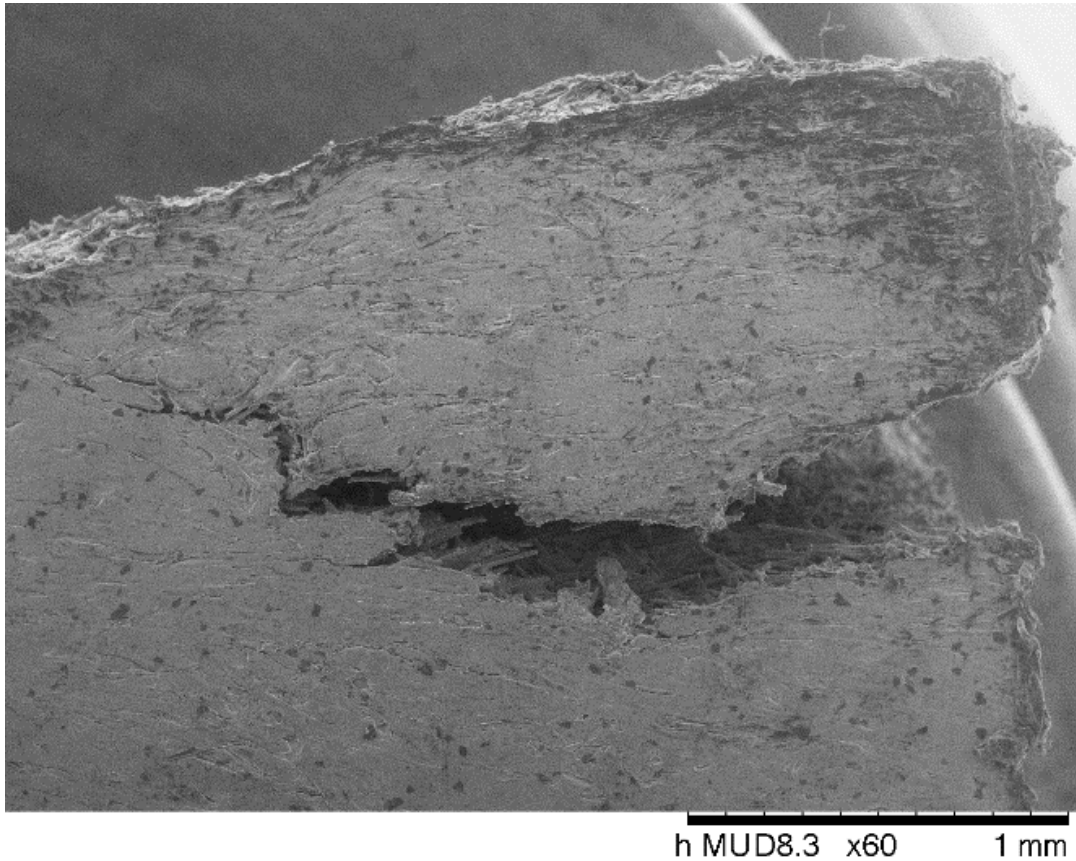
Secondary crack in a fatigue 90° specimen at 50° C
